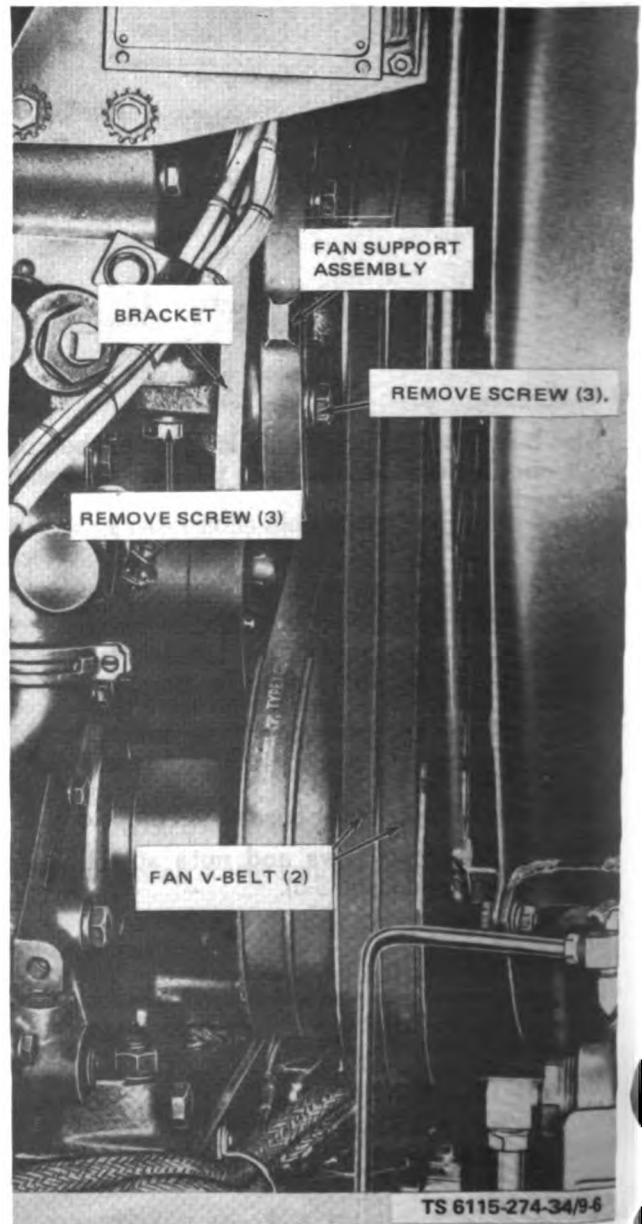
Fan Support Assembly and Bracket, Removal and Installation
